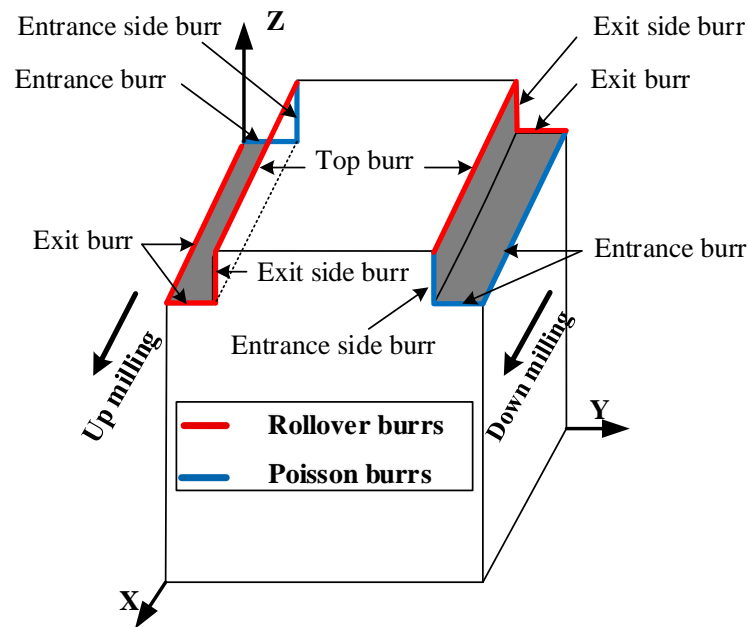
Locations of burrs in shoulder end milling⁹⁾.
